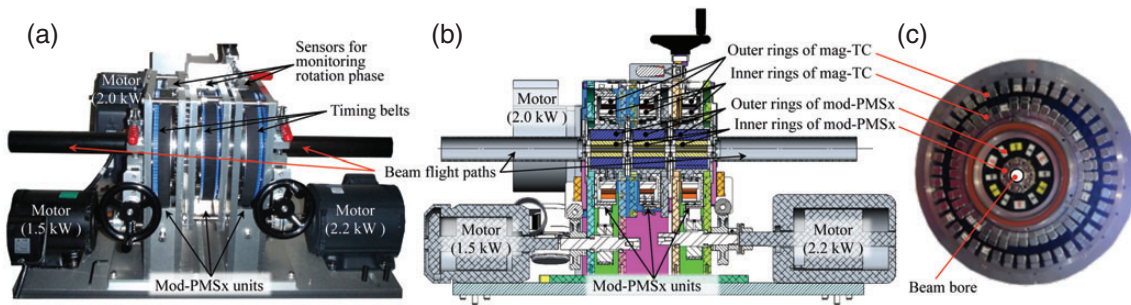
Mod-PMSx: (a) external view, (b) sectional view taken along the beam line, and (c) sectional view taken perpendicular to the beam line.
